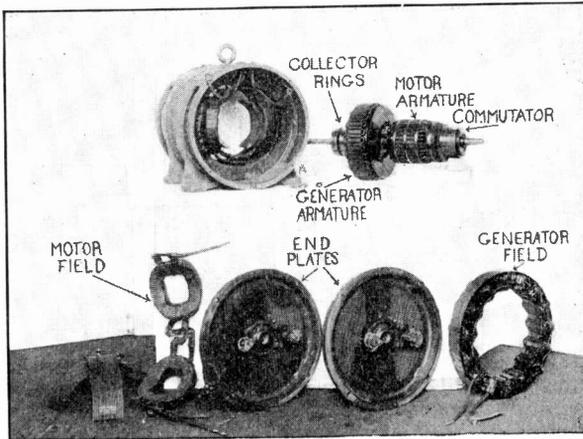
Exploded and Assembled Views of a Two-Kilowatt, Five Hundred Cycle Motor Generator Having Revolving Armature. (Courtesy of Crocker-Wheeler Company, Am-
